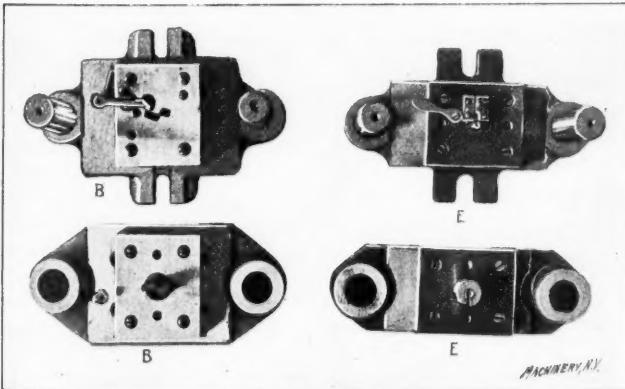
Sub-press Dies used for Stamping and Trimming Part in Fig. 1.
